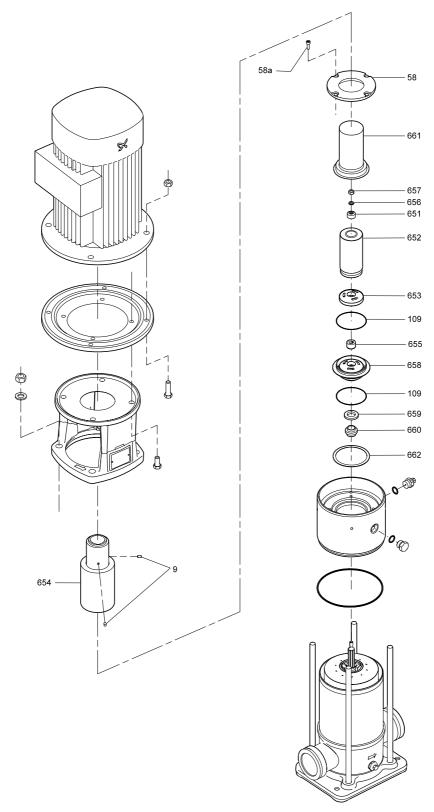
Exploded view, CRN 1, 1s, 3, 5, 10, 15, 20
